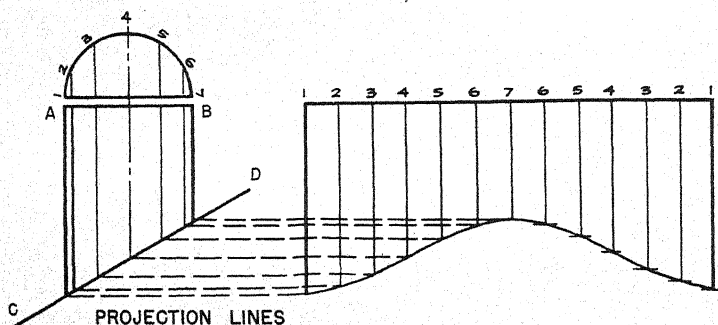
Transferring from elevation to stretchout to make the pattern.
